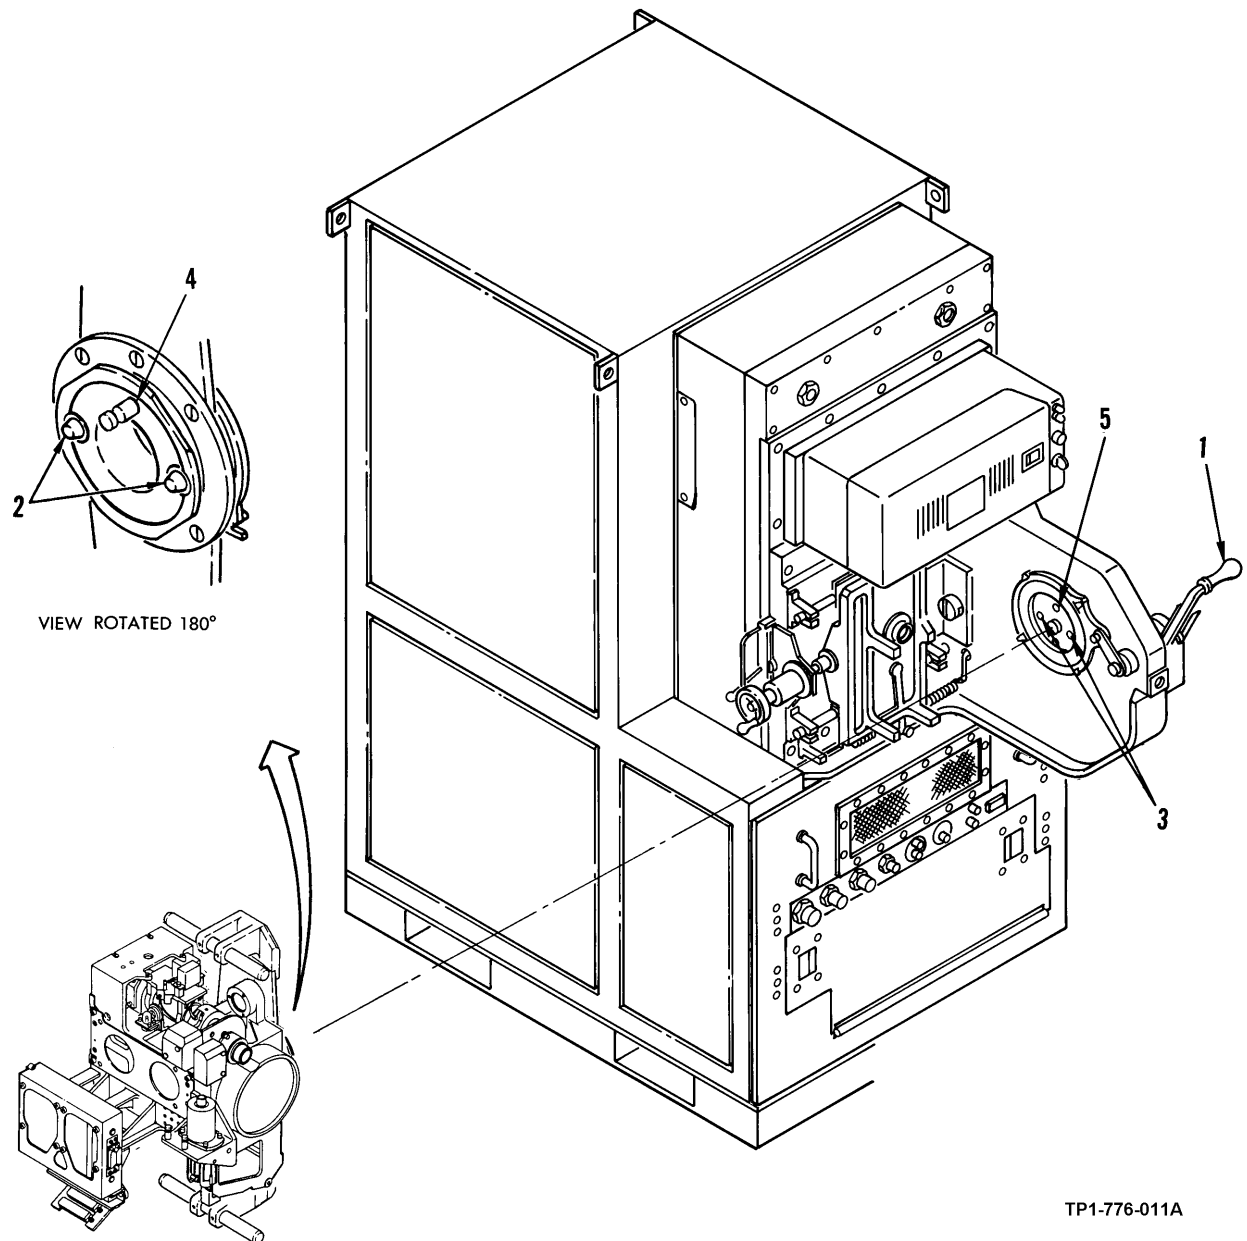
Mounting of Day Sensor Subassembly and Insert/Adapter to Sensor Mount Assembly
